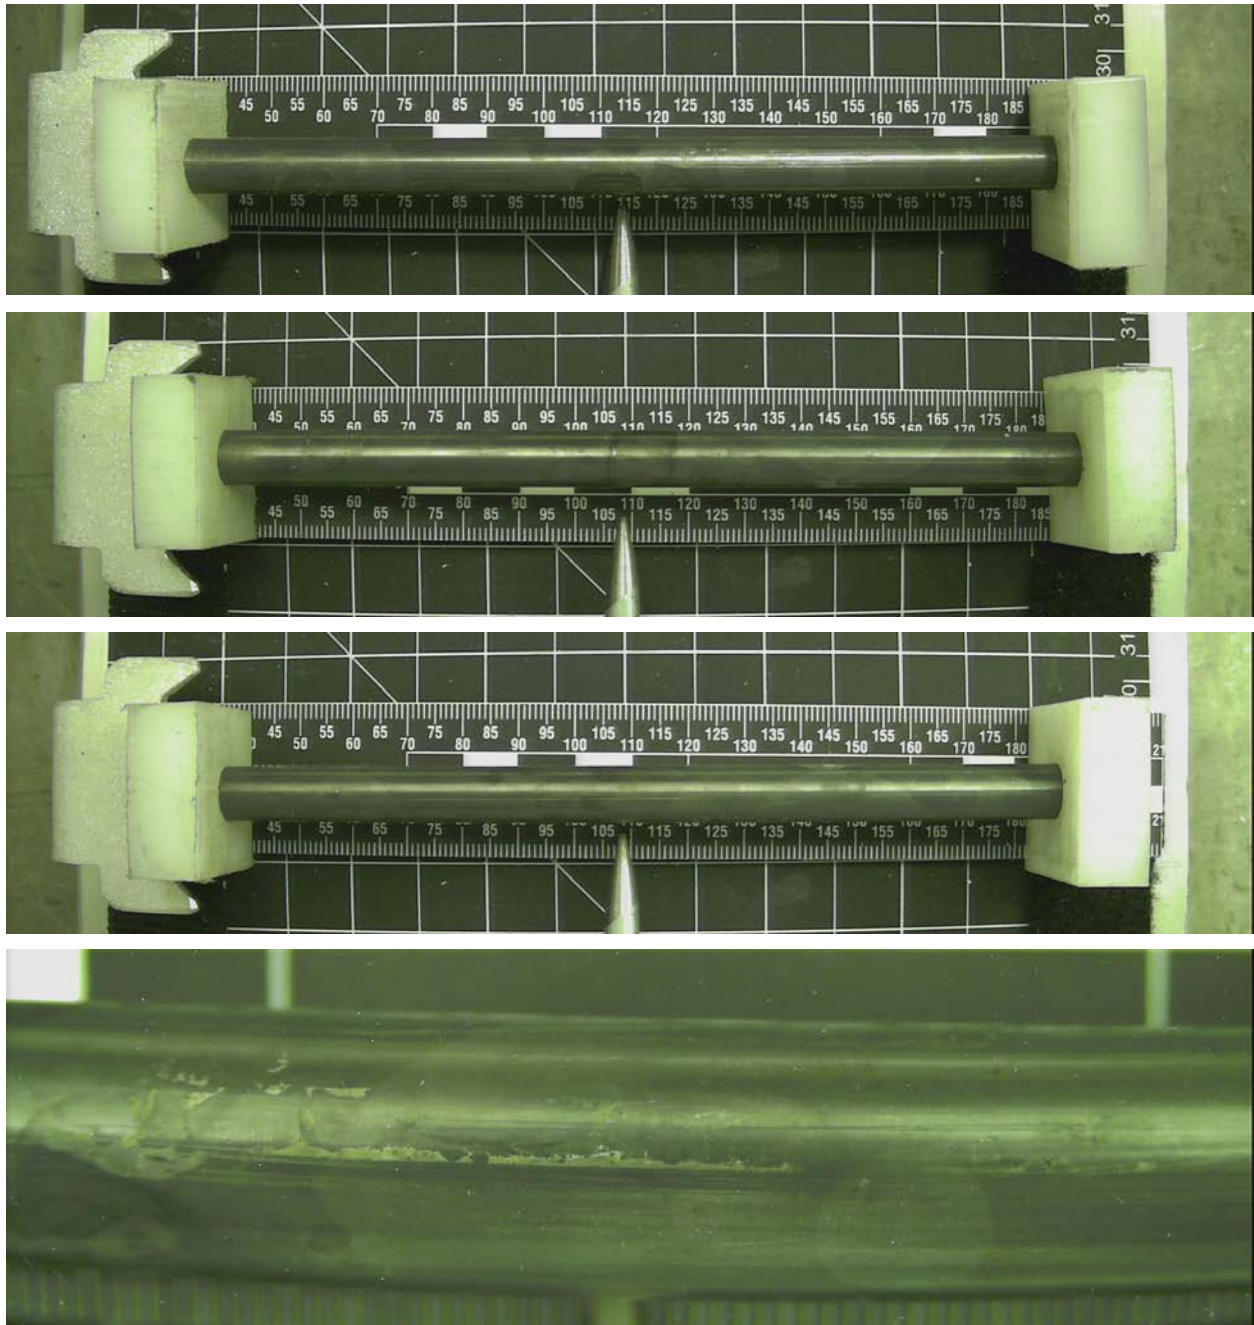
Post-Tensile Image Side 2 of Fracture for KP-4-6
